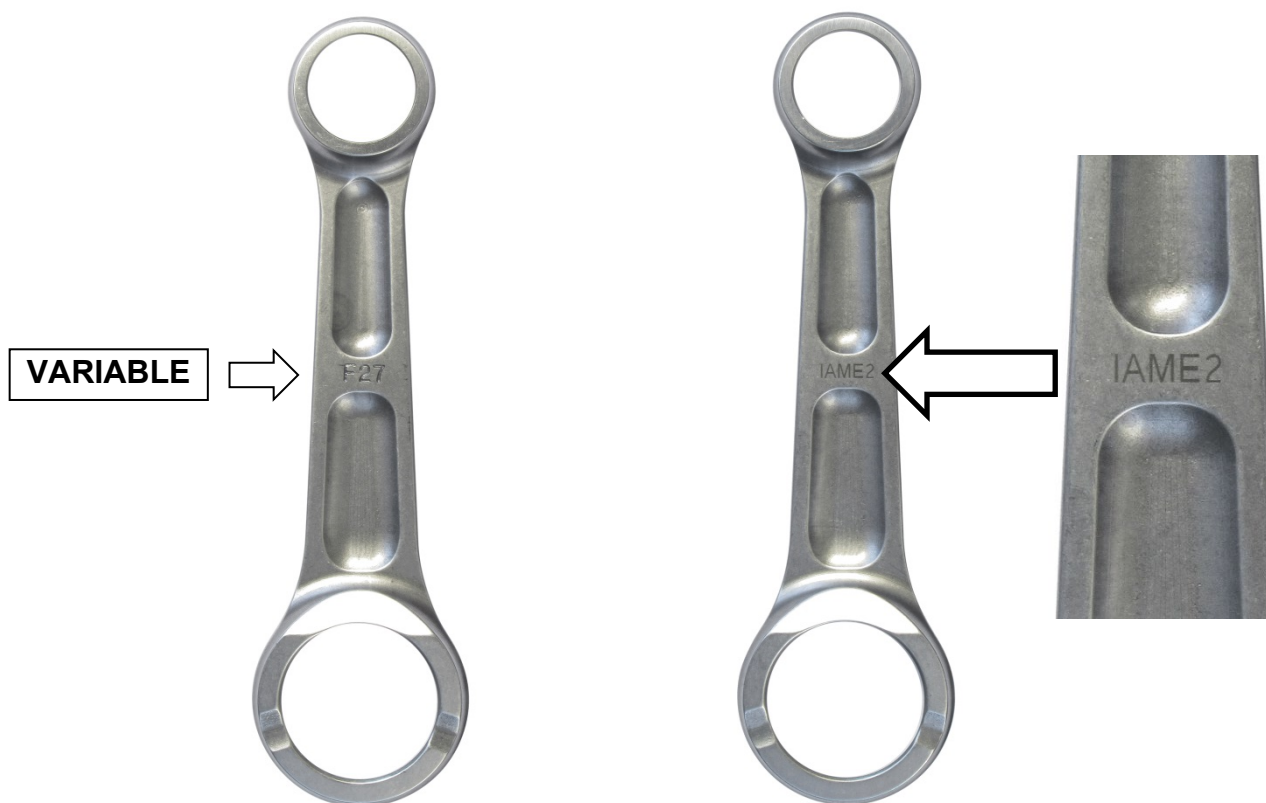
PHOTO IDENTIFICATION OF SMALL END CONROD BEARING – TYPES ALTERNATIVE
